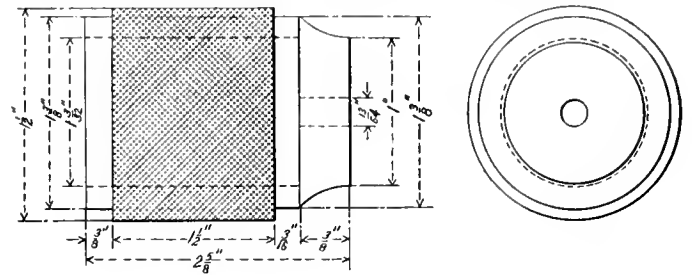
Jig for Drilling Tell-Tale Holes in Staybolts.
